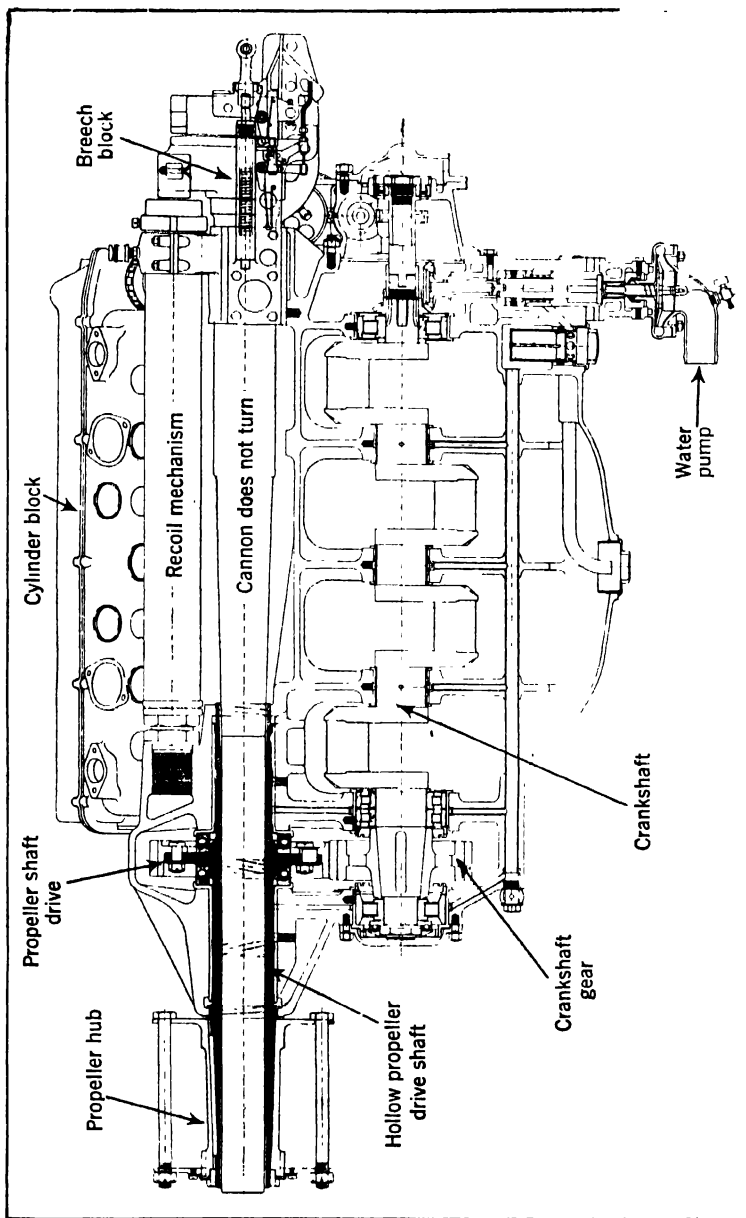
The Hispano-Suiza 220 CV "Cannon" Type Eight-Cylinder "Vee" Aviation Motor with Hollow Propeller Driveshaft with Cannon and Recoil Mechanism Forming Part of the Engine Assembly.
